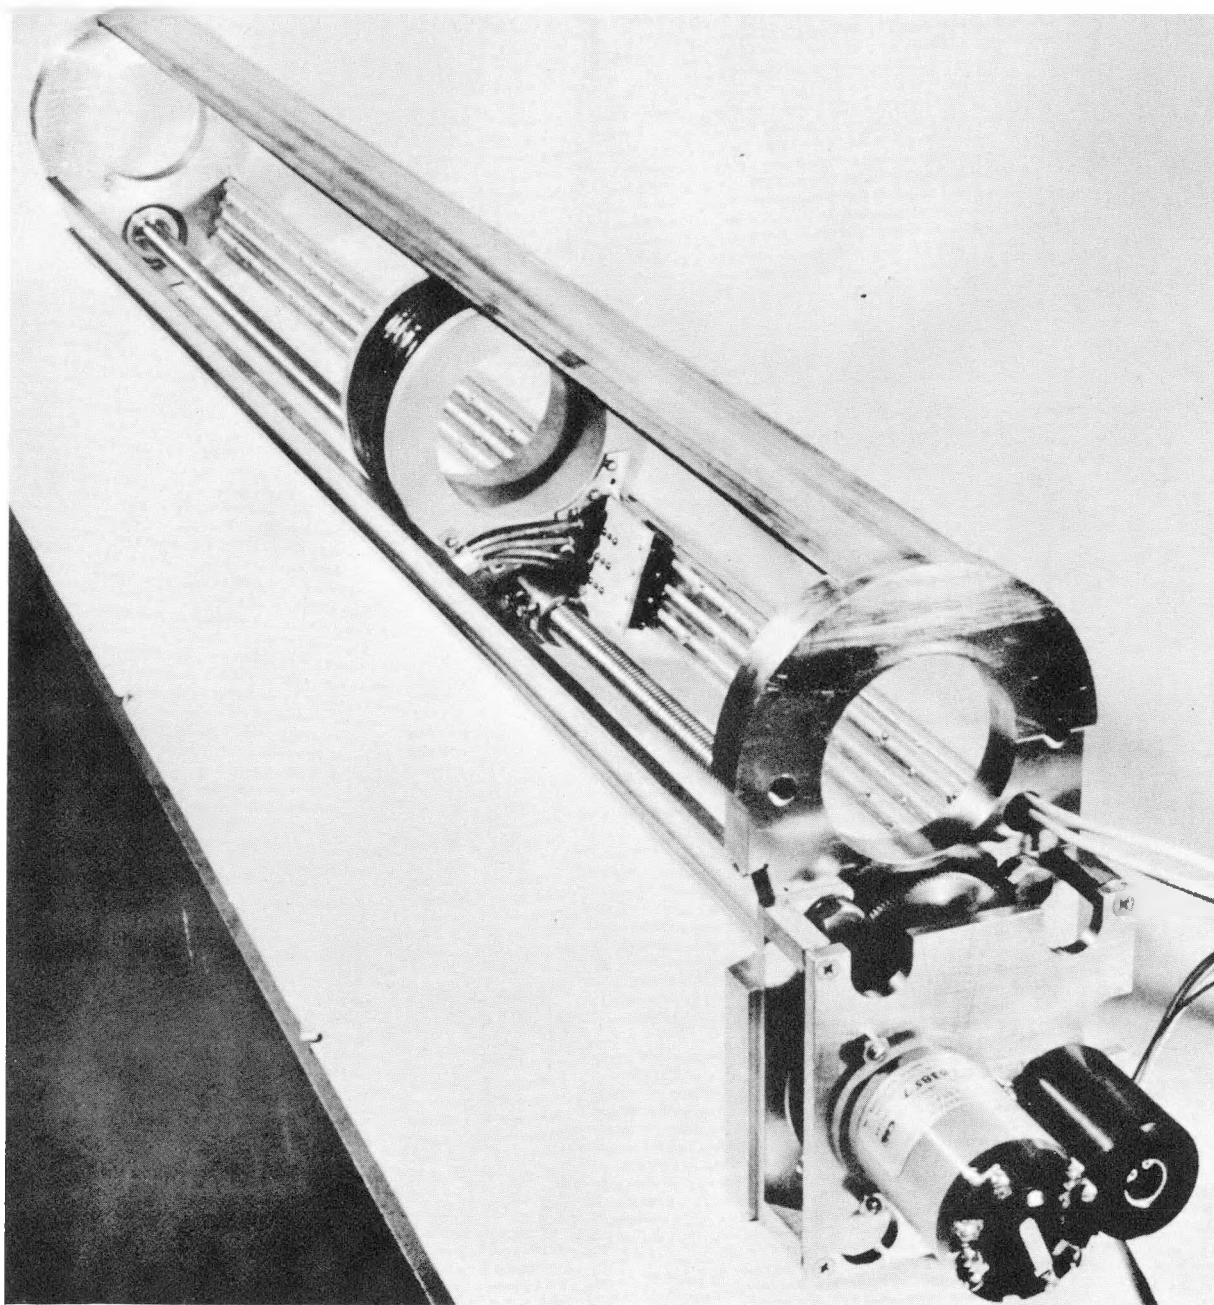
Assembled Position Indicator Differential Transformer, Lead Screw, Drive Motor and Synchro Transmitter
